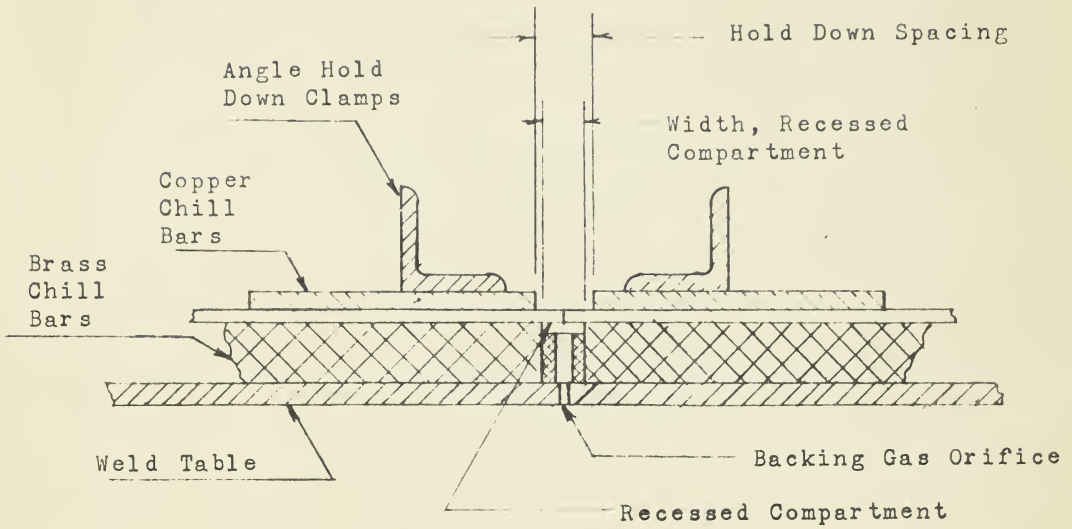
Schematic Outline of Recessed Welding Compartment.
